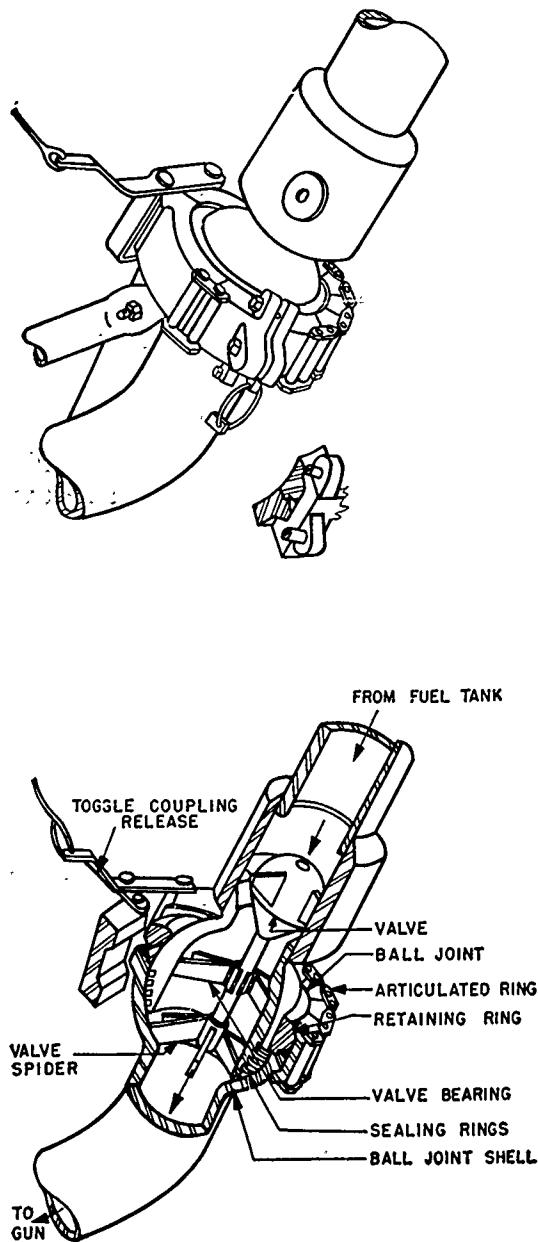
Sketch of ball-socket joint of hitch between trailer and M5A1 light tank with the E9 flame thrower.
